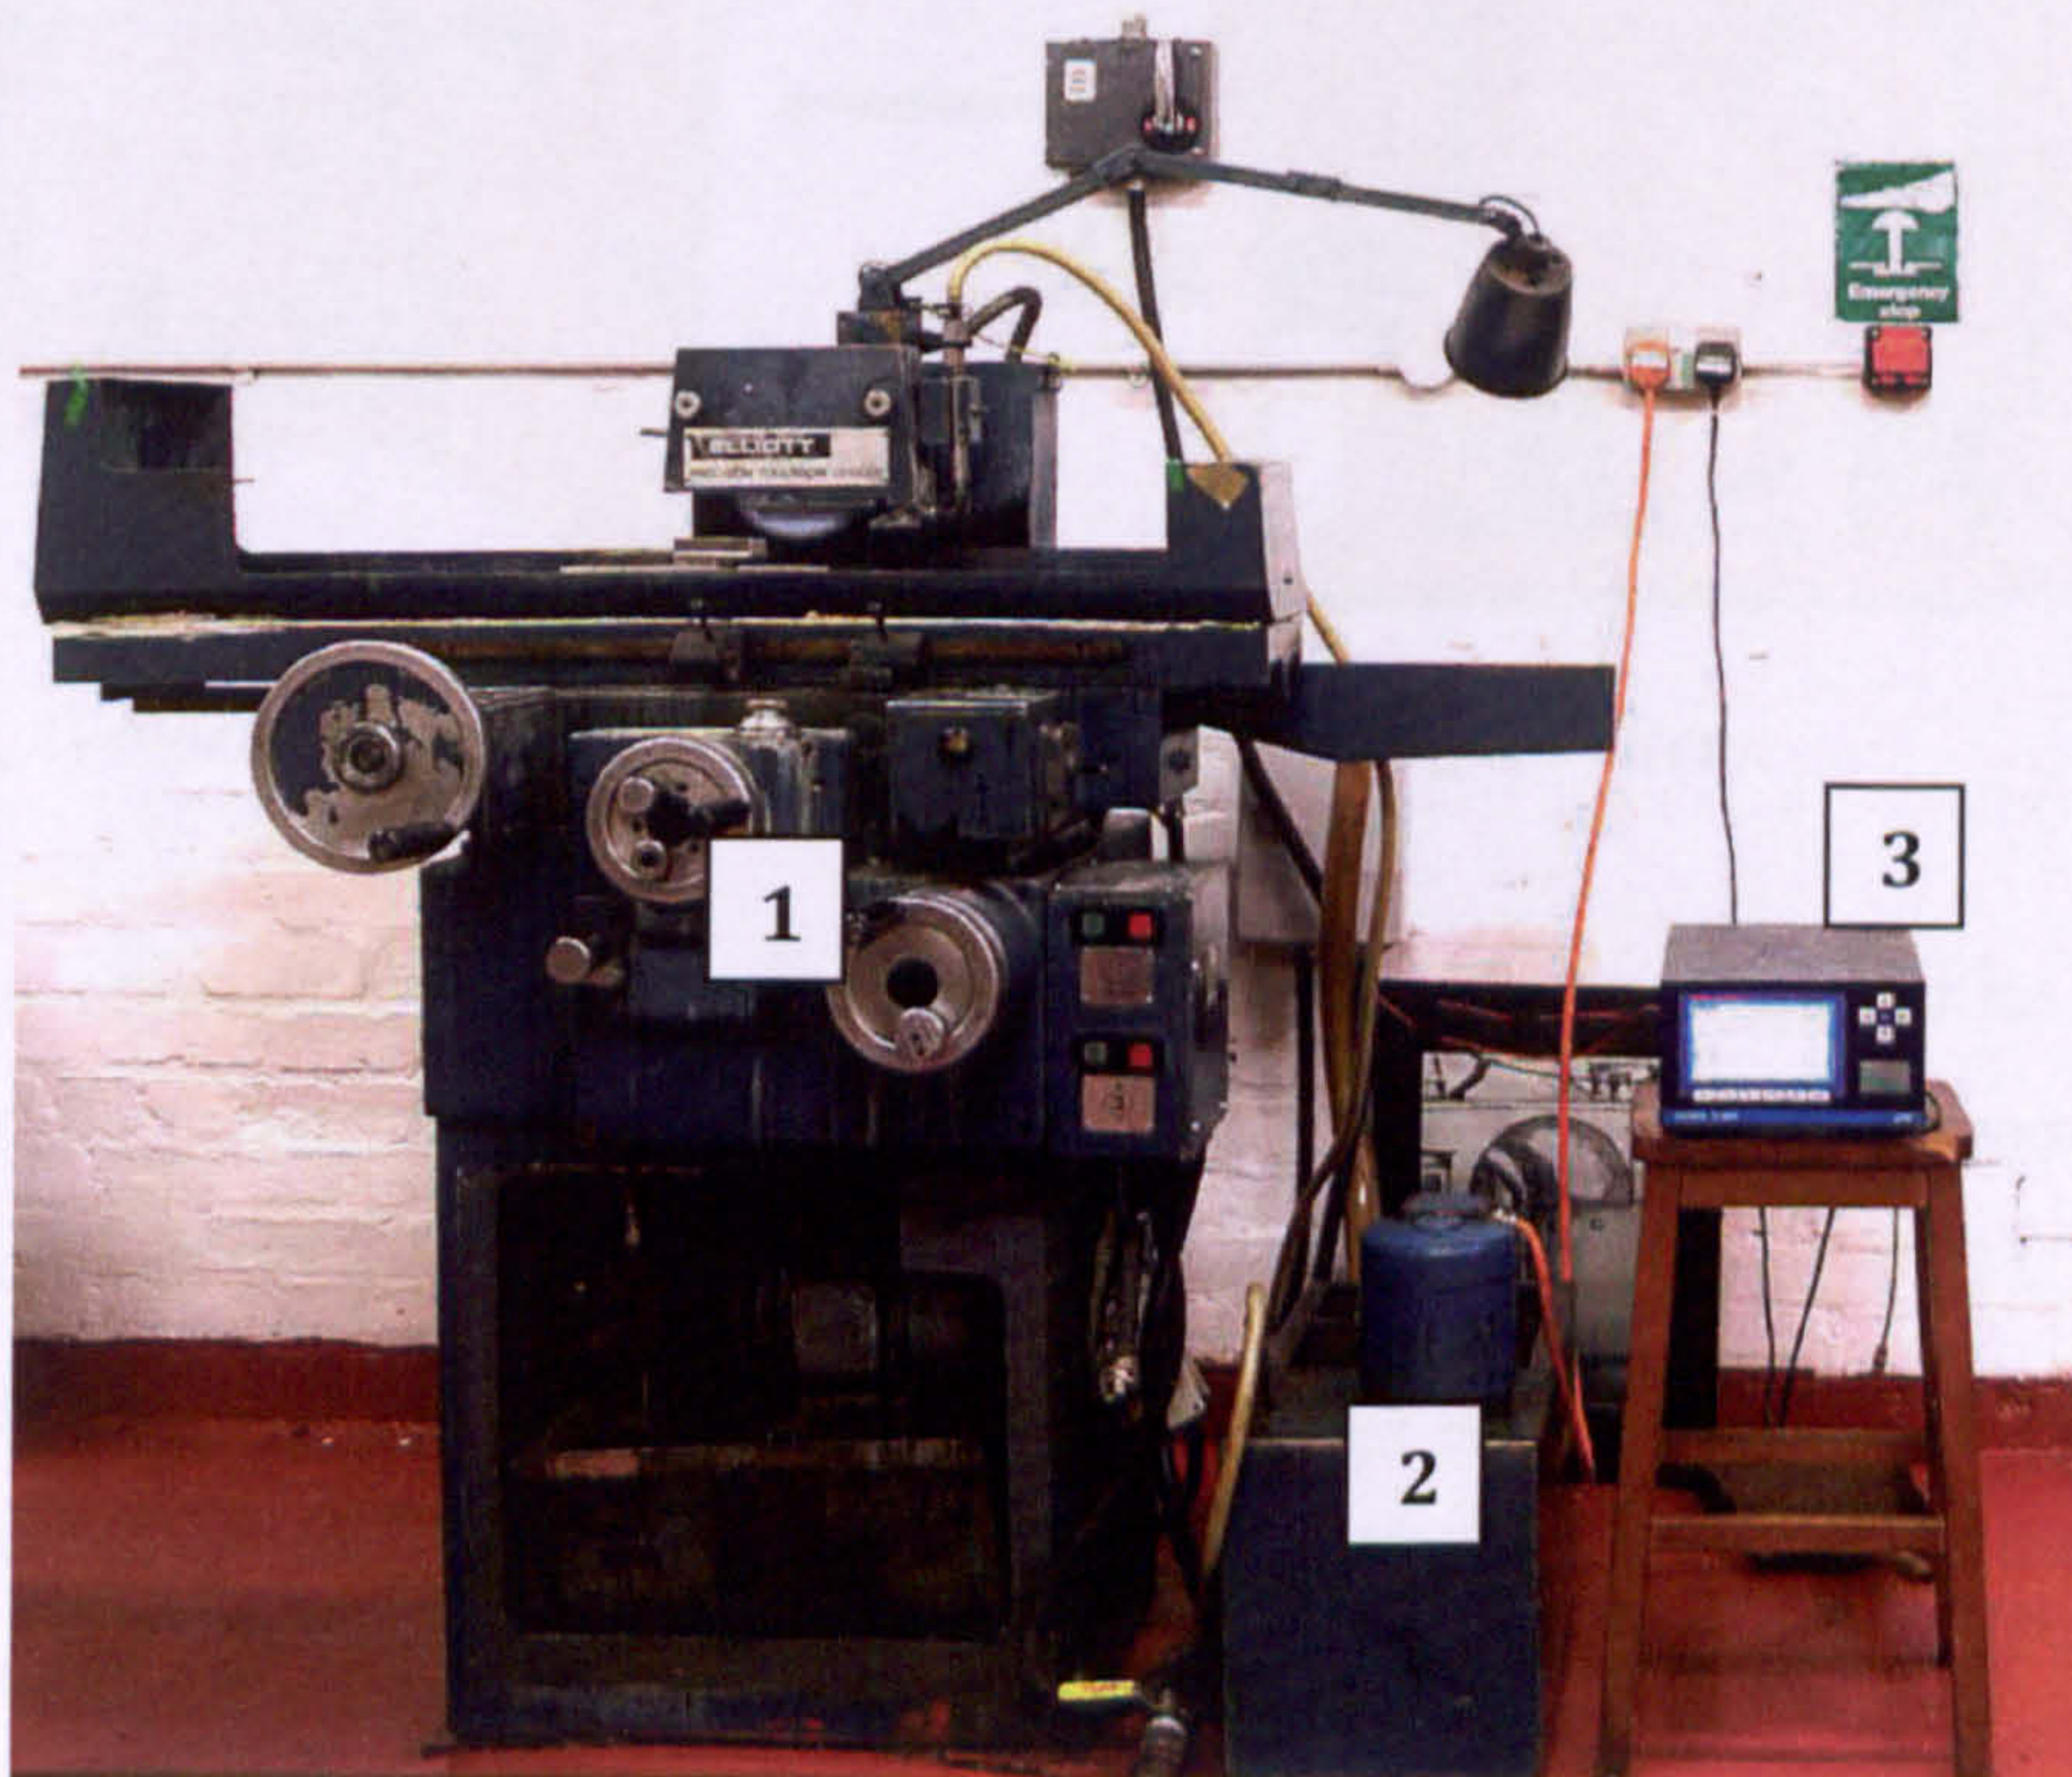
Elliot toolroom grinding machine, where: 1 – grinding machine, 2 – fluid supply and filtration system, 3 – power analyser.
